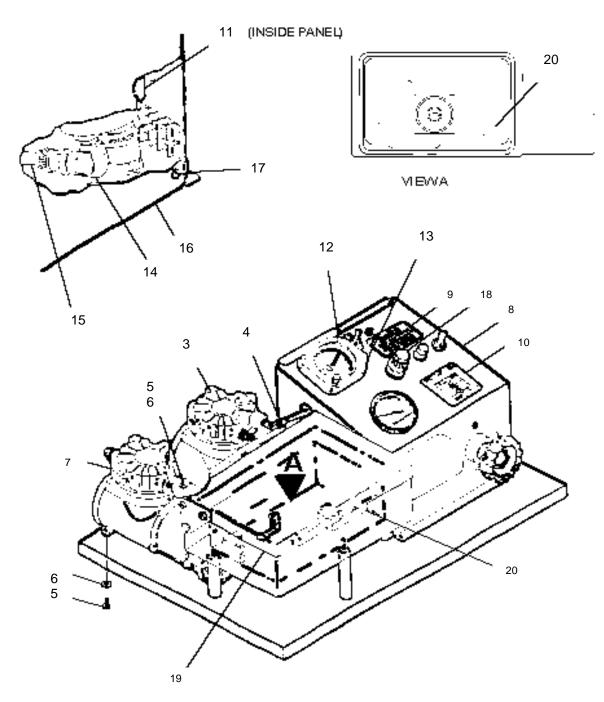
TEST CHAMBER ASSEMBLY, MODEL 452(SHEET 2 of 2)
